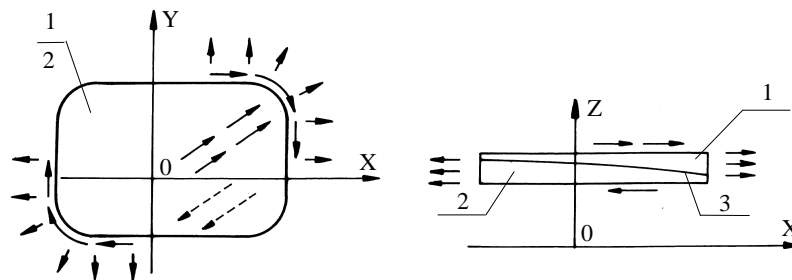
Layout of an adhesive joint. 1 - adherend 1, 2 - adherend 2, 3 - adhesive
